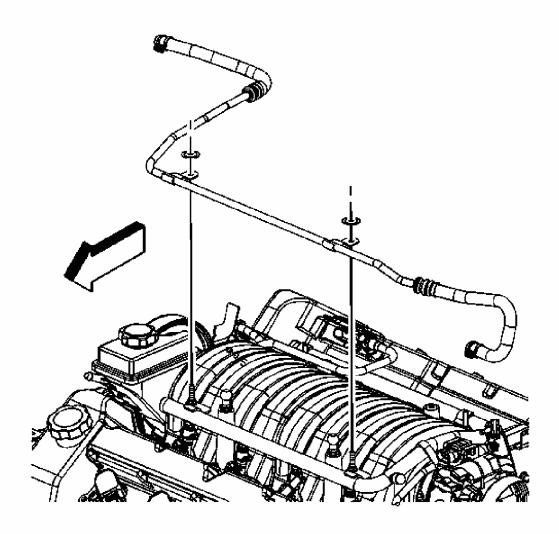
Identifying Surge Tank Inlet Hose/Pipe & Clips Courtesy of GENERAL MOTORS CORP.
